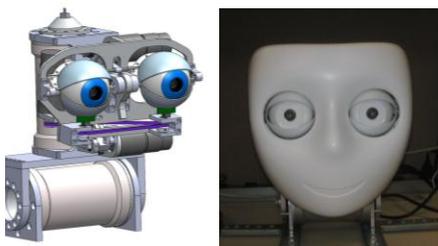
The RoNA head design with 5 DOFs. Left picture shows the overall head design and the right picture shows the RoNA head with face assembled.
